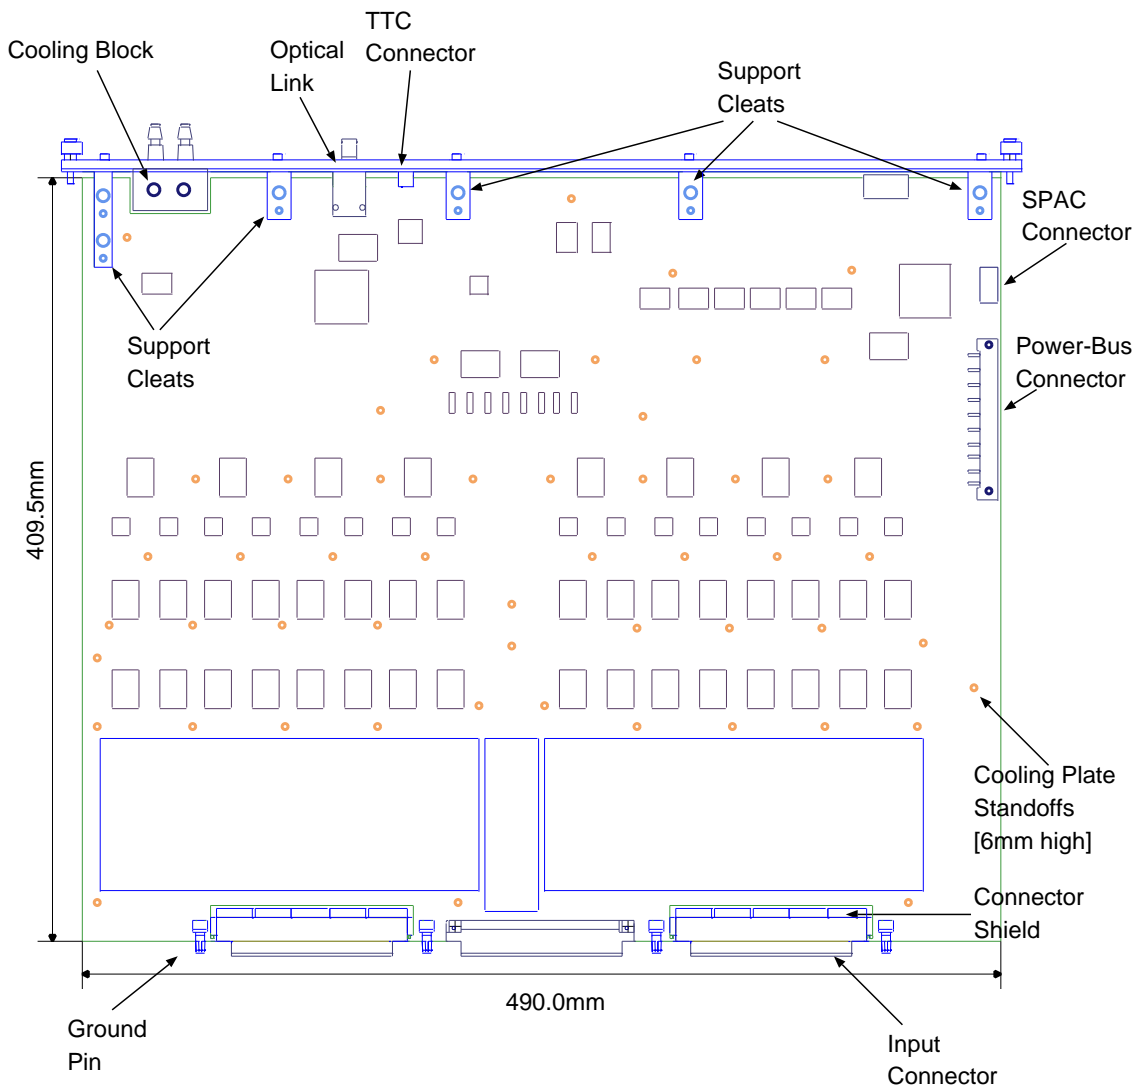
Mechanical drawing of the FE electronics boards showing board dimensions, connector locations, and locations of the front panel supports.
